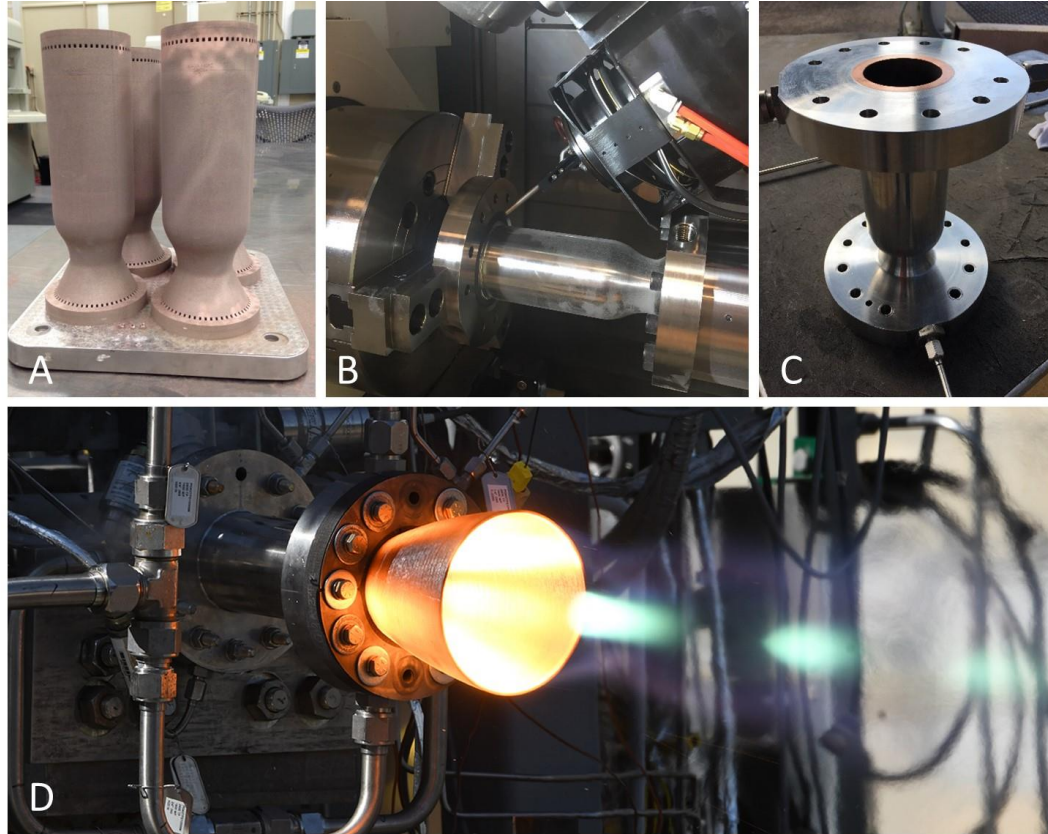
Bimetallic AM chamber under PI043. A) GRCop-84 L-PBF chambers, B) Hybrid LP-DED machine following jacket deposition and manifolds setup for welding on hybrid machine, C) AM bimetallic chamber during proof testing, D) AM bimetallic chamber with C-C nozzle extension during testing.
